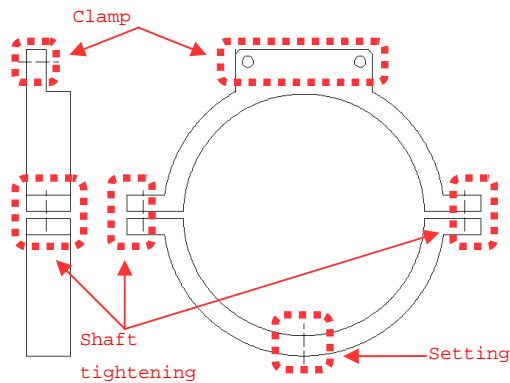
a.Brake fixtures conceptual design and assembly.
